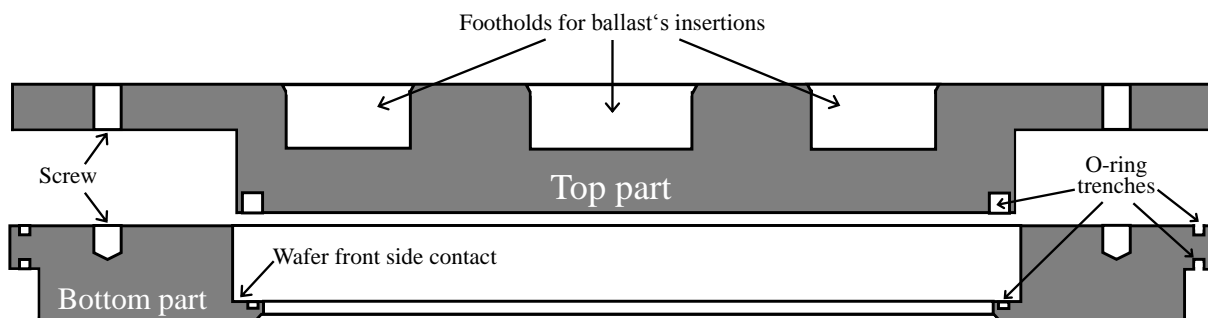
Cross-sectional sketch of the metallic wafer holder.
